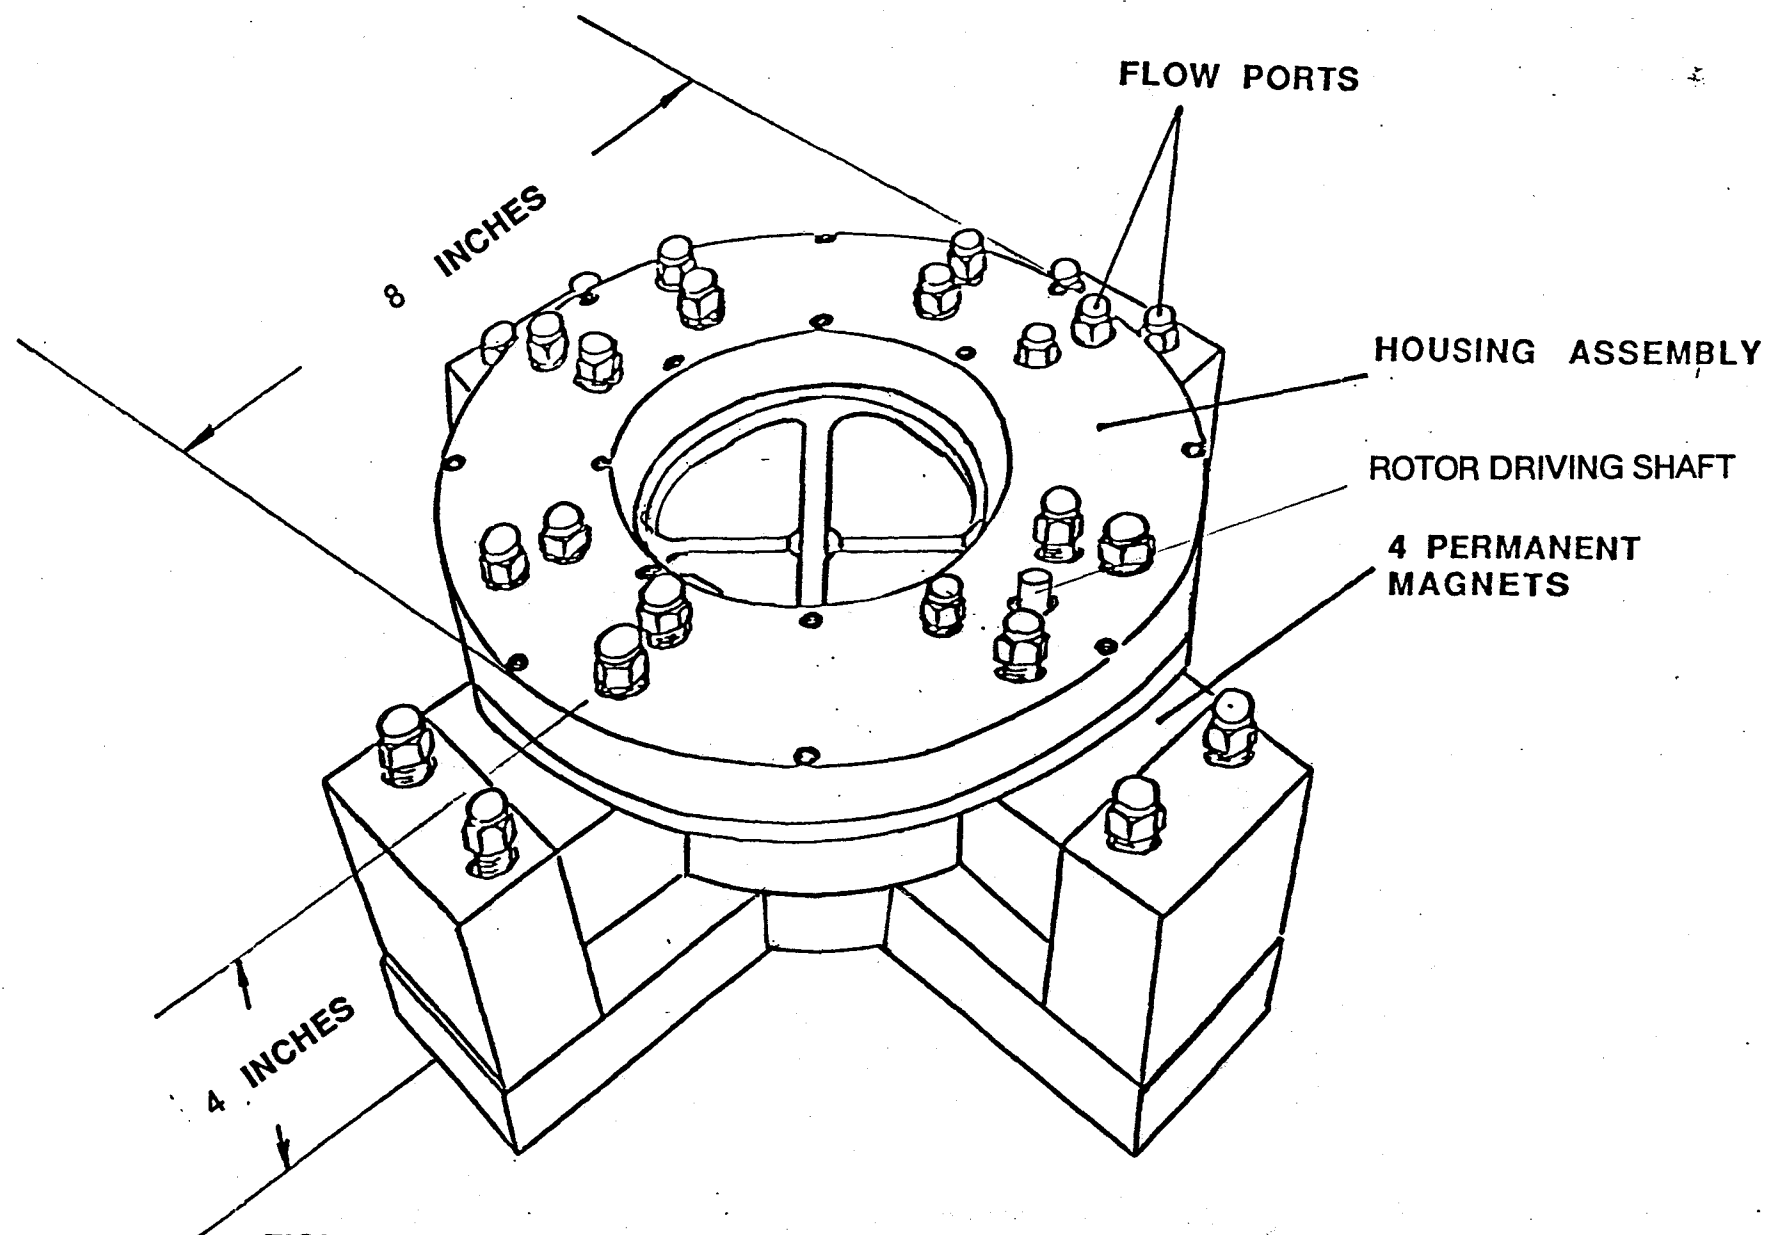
PICTORIAL SKETCH OF A MAGNETIC HEAT PUMP HOUSING ASSEMBLY
